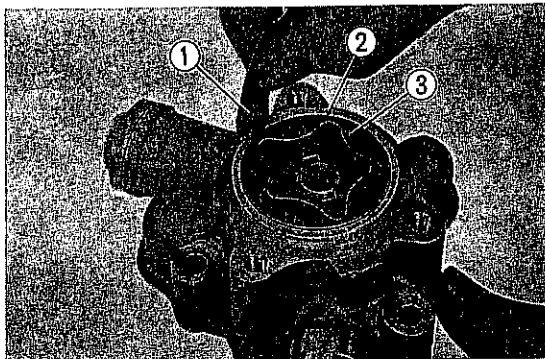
① Feeler gauge ② Pump body ③ Outer rotor
